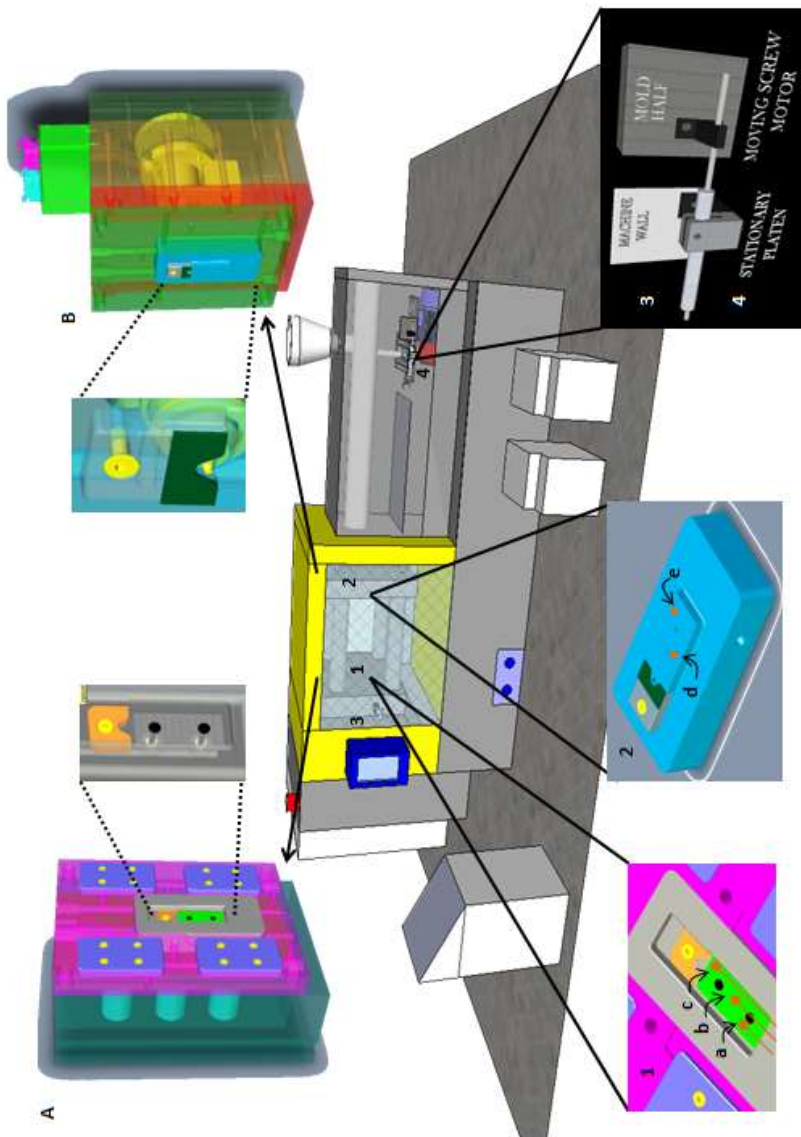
Film insert injection compression molding unit: (A) interchangeable female cavity with inner edge vacuum/air compression vents and adjustable shims, (B) interchangeable male core with Teflon squeeze insert and hydraulic 3-zone pin gated hot runner and the instrumentation of (1) thermal monitoring of the display with 3 thermocouples at the cavity side, (2) melt pressure monitoring with 2 pressure transducers and (3) mold and screw movement monitoring LVDTs.
